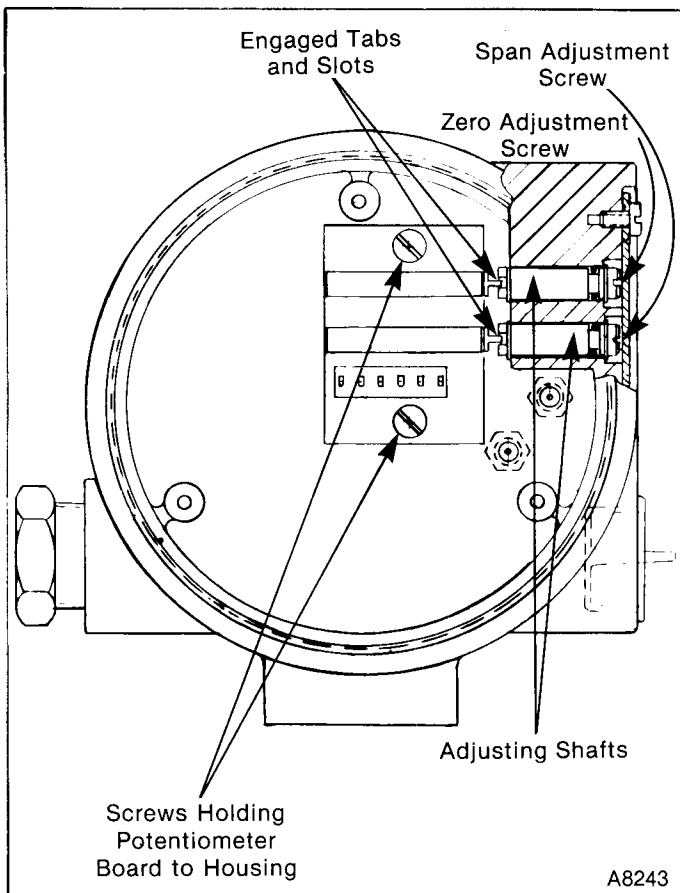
Potentiometer Assembly in Amplifier Housing
